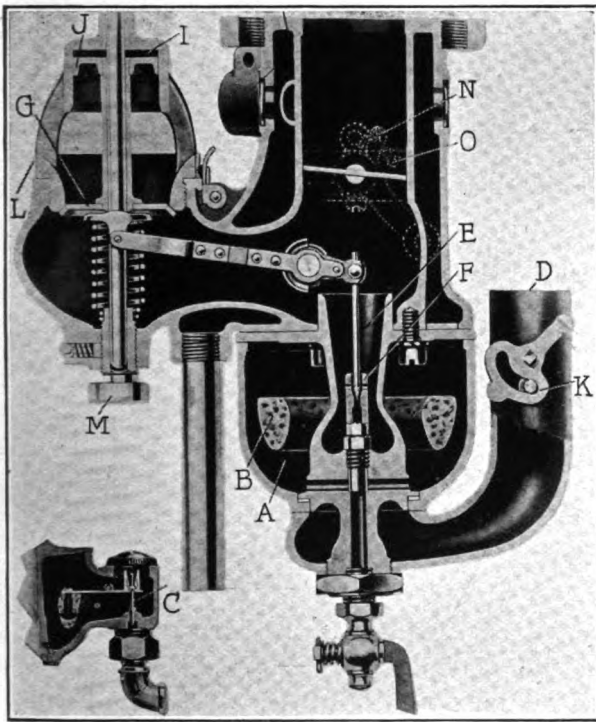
Cutaway View of the Components of the Schebler Model R Carburetor.
